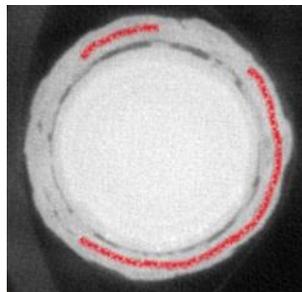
XCT analysis of GACE 3 showing location of tube fracture (red line)
